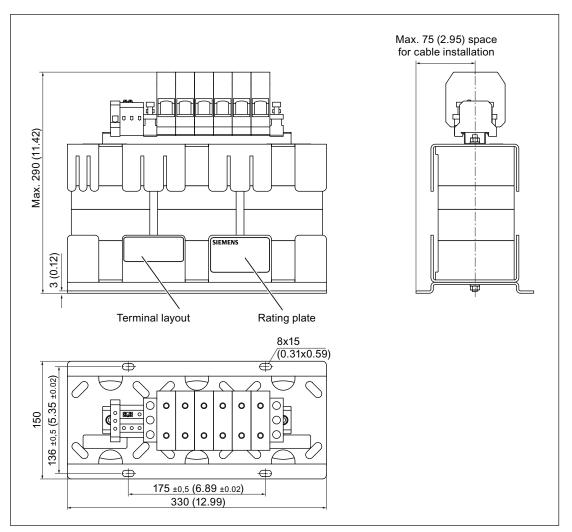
Dimension drawing of HFD line reactor 55 kW, all dimensions in mm and (inches)
